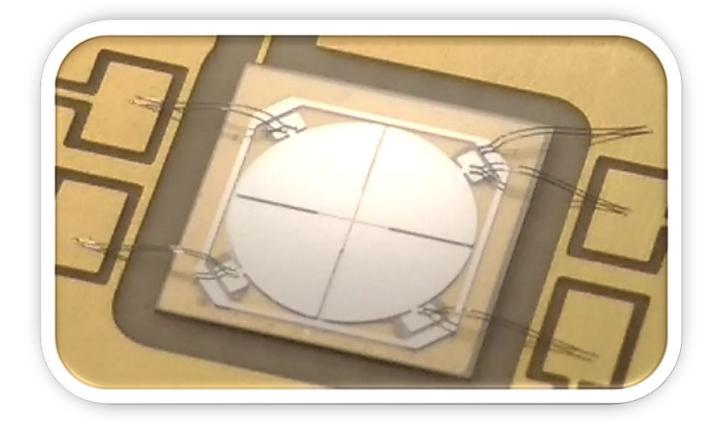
Example of a quadrant beam monitor designed and manufactured at Micron Semiconductor Ltd, and assembled by Micron Semiconductor Ltd on a customer-supplied PCB. This design can also be assembled on the MSL-DD-04 board
